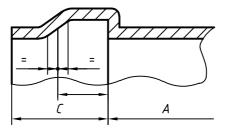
Basic dimensions of sockets and spigots for elastomeric ring seal joints
